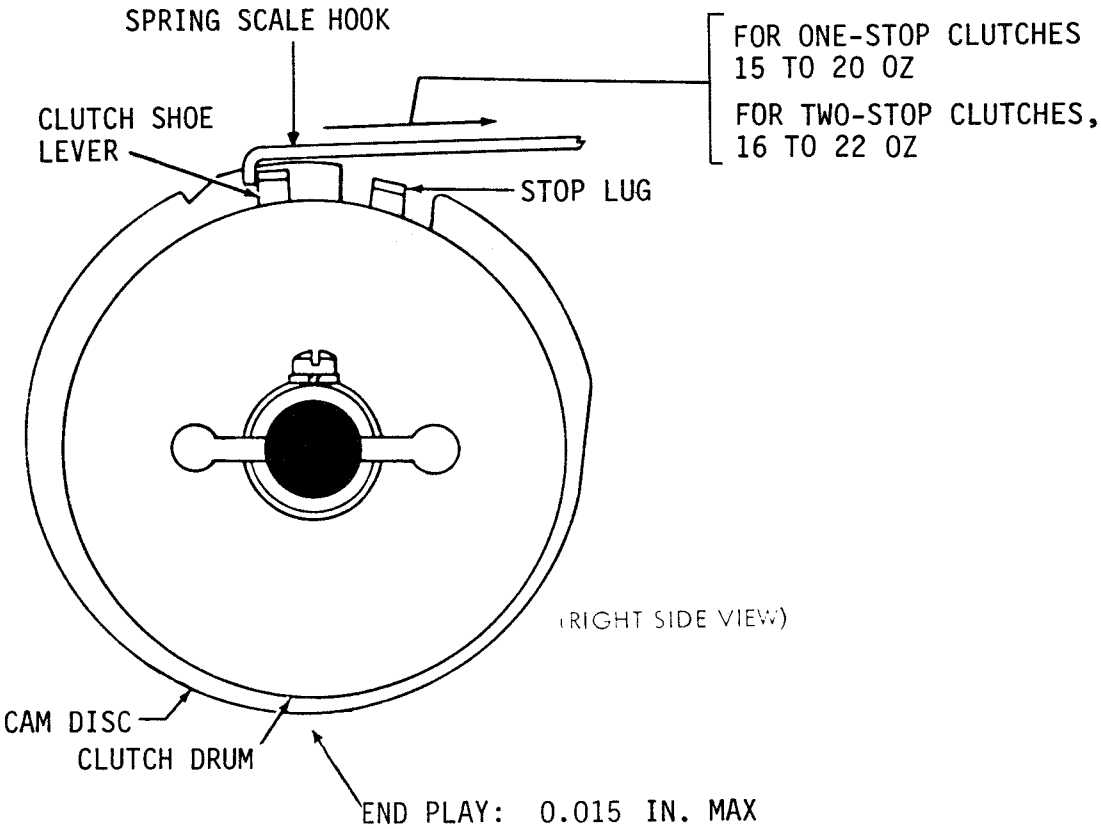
Clutch Drum Position and Clutch Shoe Lever Spring
